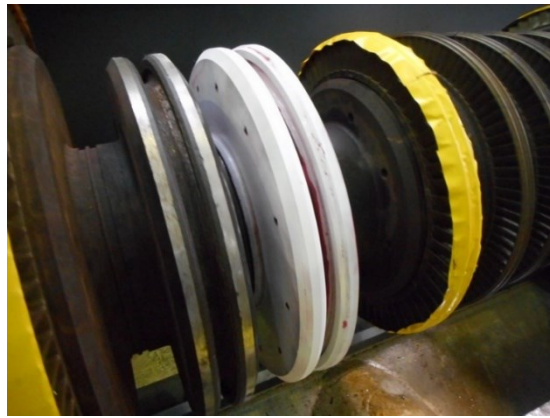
Liquid penetrant testing on the welded areas
